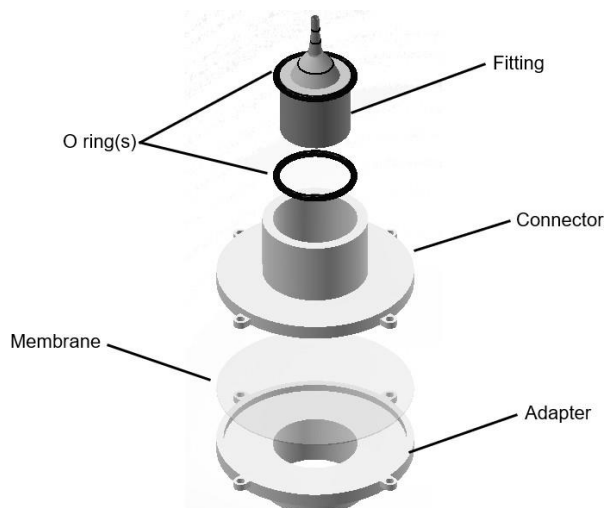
Exploded assembly drawing of the membrane jig within the membrane test setup.
